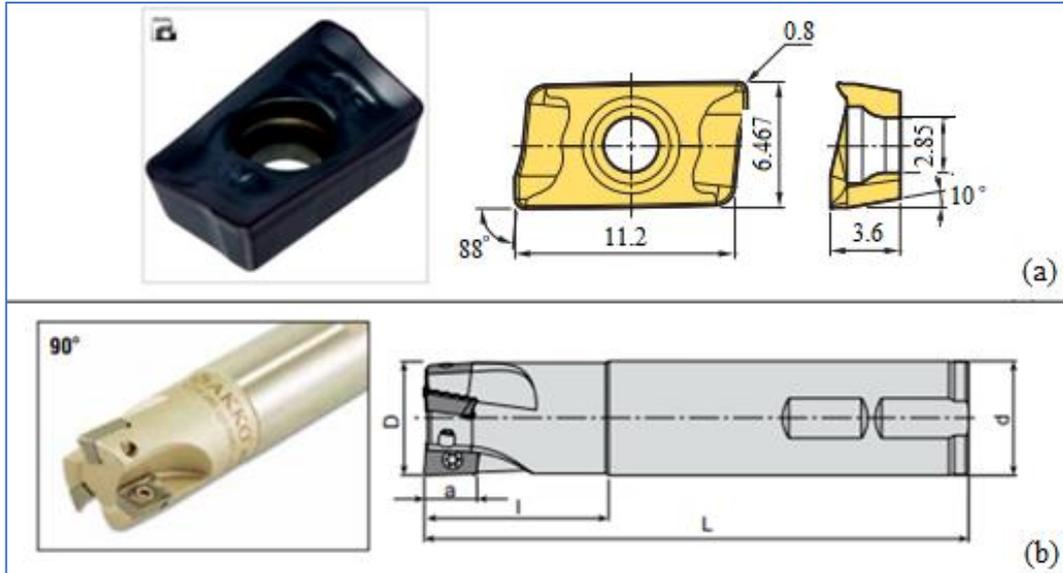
a) Cutting tool and b) Tool holder (a) Kesici takım ve b) Takım tutucu
